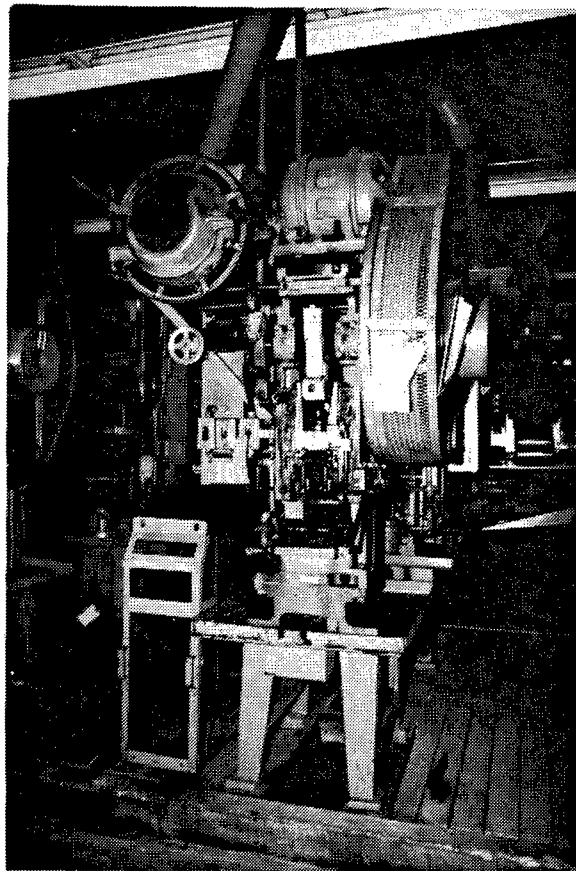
Building 102: Bullet Draw Machine manufactured in 1952 by E.W. Bliss Company.
